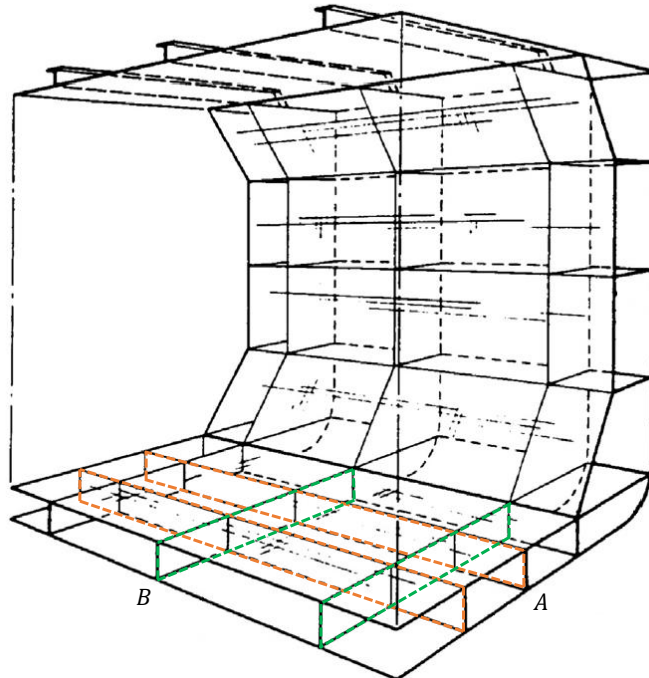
Schematic of a ship's hull construction without secondary stiffening drawn. (A) Longitudinal stiffening, also called girders, are marked with orange. (B) The transverse stiffening, also called frames, are marked with green. Image taken from [6].
